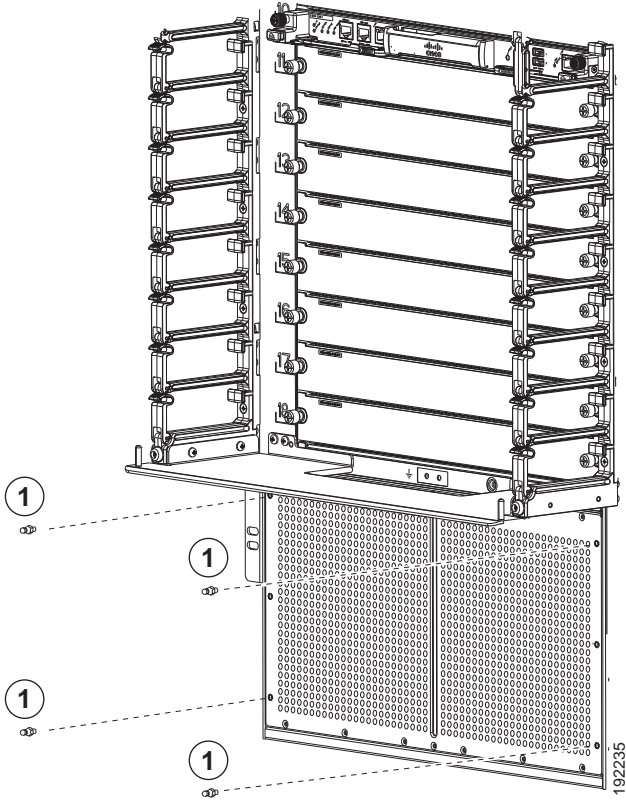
Attaching the Hinge Bracket to the Cable Management Frame and Chassis
